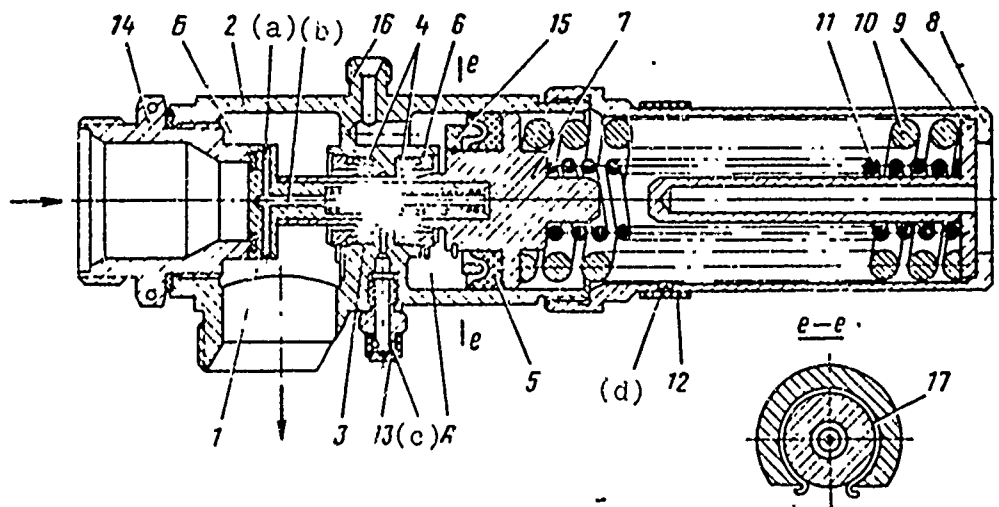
A normally closed valve: A - controlling cavity; B - liquid cavity; a, b - bores; c, d - vent openings; 1 - valve; 2 - housing; 3 - spring; 4, 5 - seal rings; 6 - ring; 7 - insert; 8 - spring casing; 9 - detent; 10, 11 - springs; 12 - dust-protection ring; 13, 14, 16 - tube connections; 15 - ring; 17 - wire.
